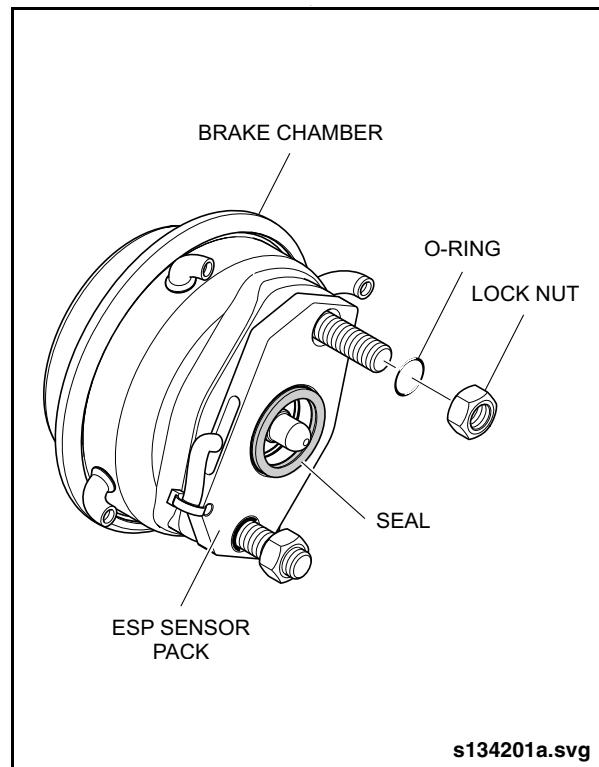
Front Brake Chamber ESP Sensor Pack
